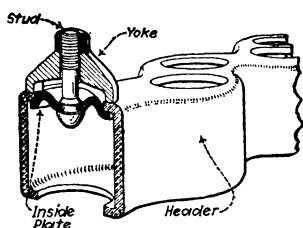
Fittings for elliptical hand-hole in wrought steel header.
